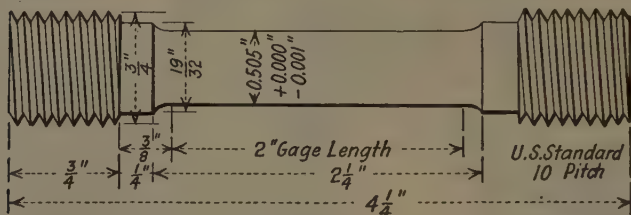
TEST SPECIMEN USED BY MALCOLM IN HIGH-TEMPERATURE TESTS
